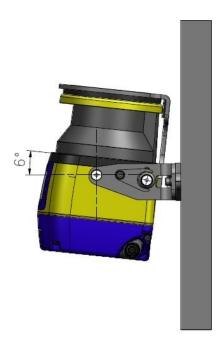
Scanner Mounting and Pitch Angle Adjustment
